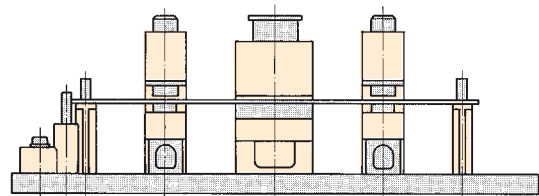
Design of a combined positioning plate for the processing of 2 different workpieces
